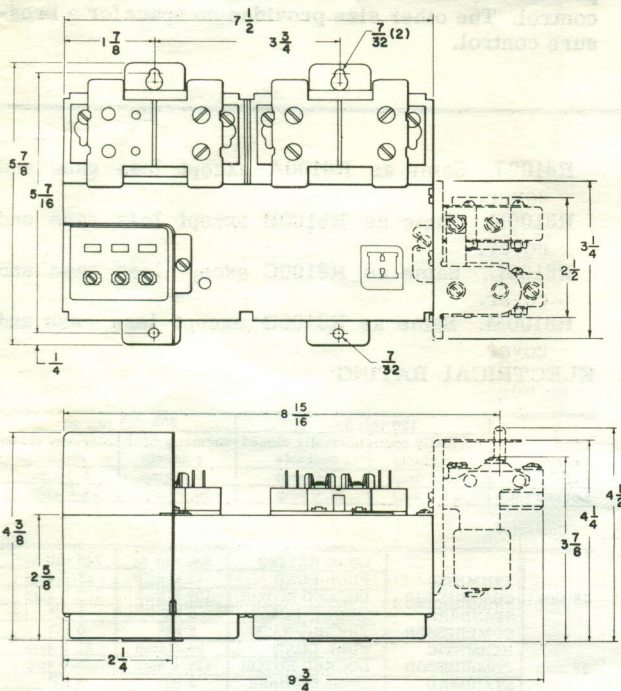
R8100 Subpanel installation dimensions (in inches).
